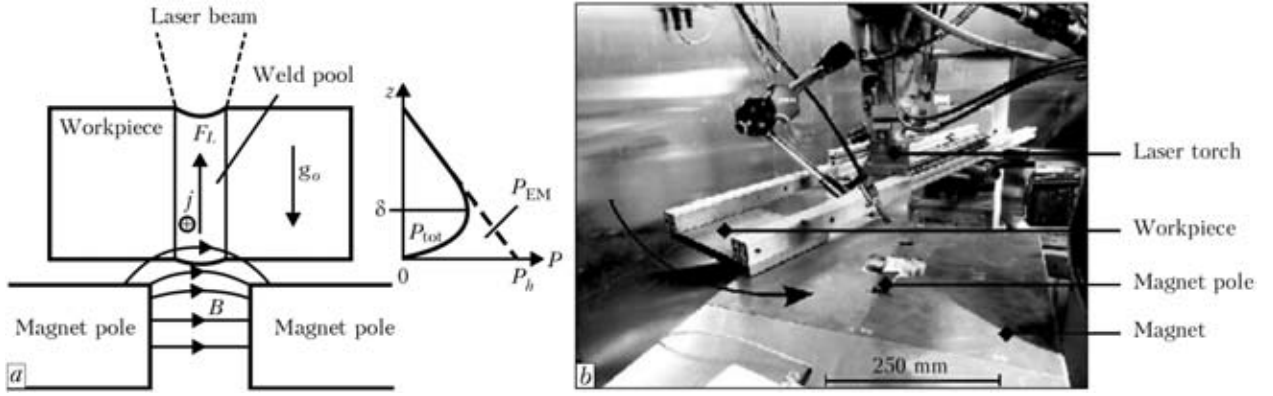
a* – scheme of the electromagnetic weld pool support system; *b* – experimental setup
